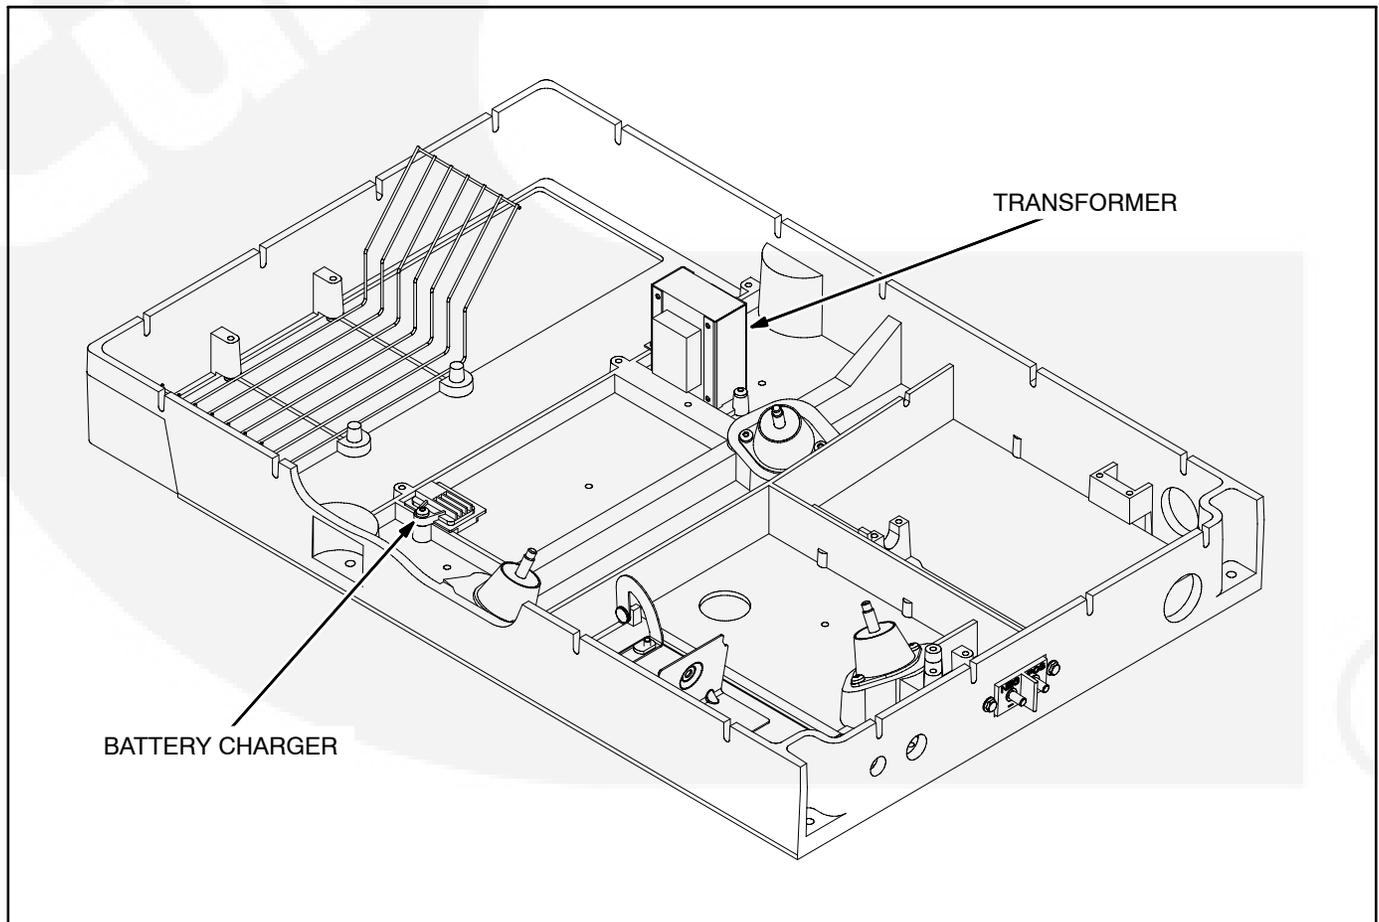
BATTERY CHARGER AND TRANSFORMER
